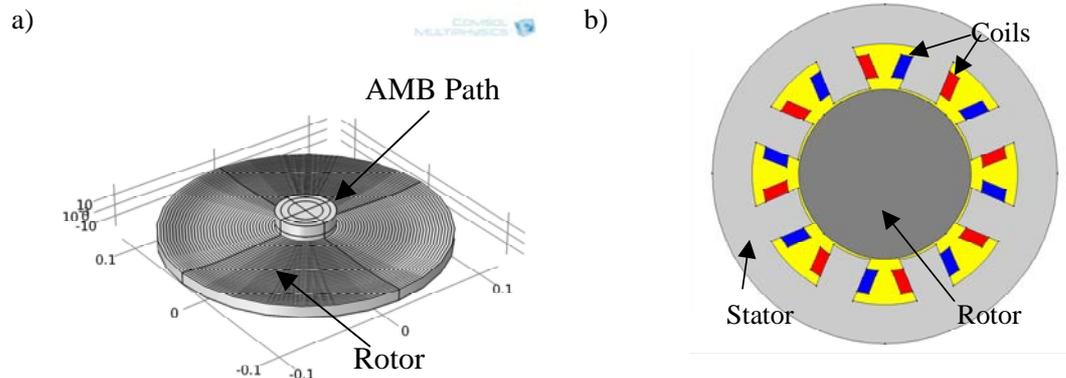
Generated geometries: a) complete flywheel rotor; b) AMB
